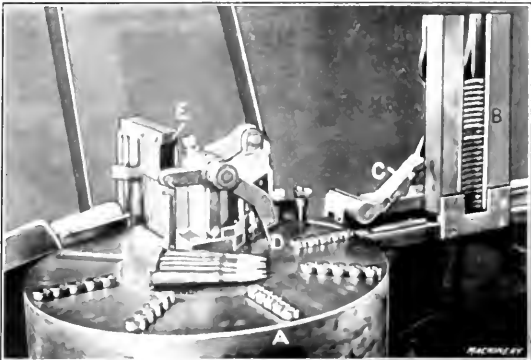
A Closer View of the Machine shown in Fig. 9, illustrating the Operating Mechanism
